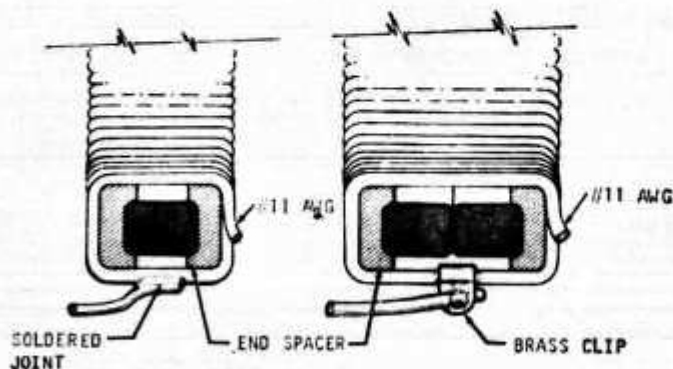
Details of alternate methods for making the tap connections to the toroidal tank coils. Care must be taken to prevent solder from bridging over to the core, thus promoting a flash-over. Excessive heat must be avoided when soldering near the end-spacers so as to prevent their being melted.
